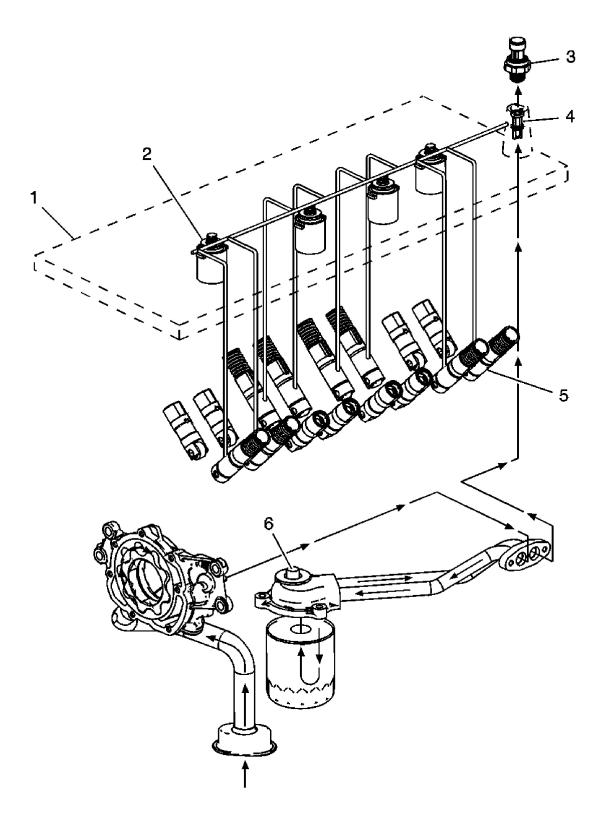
Valve Lifter Oil Manifold Assembly Courtesy of GENERAL MOTORS CORP.
